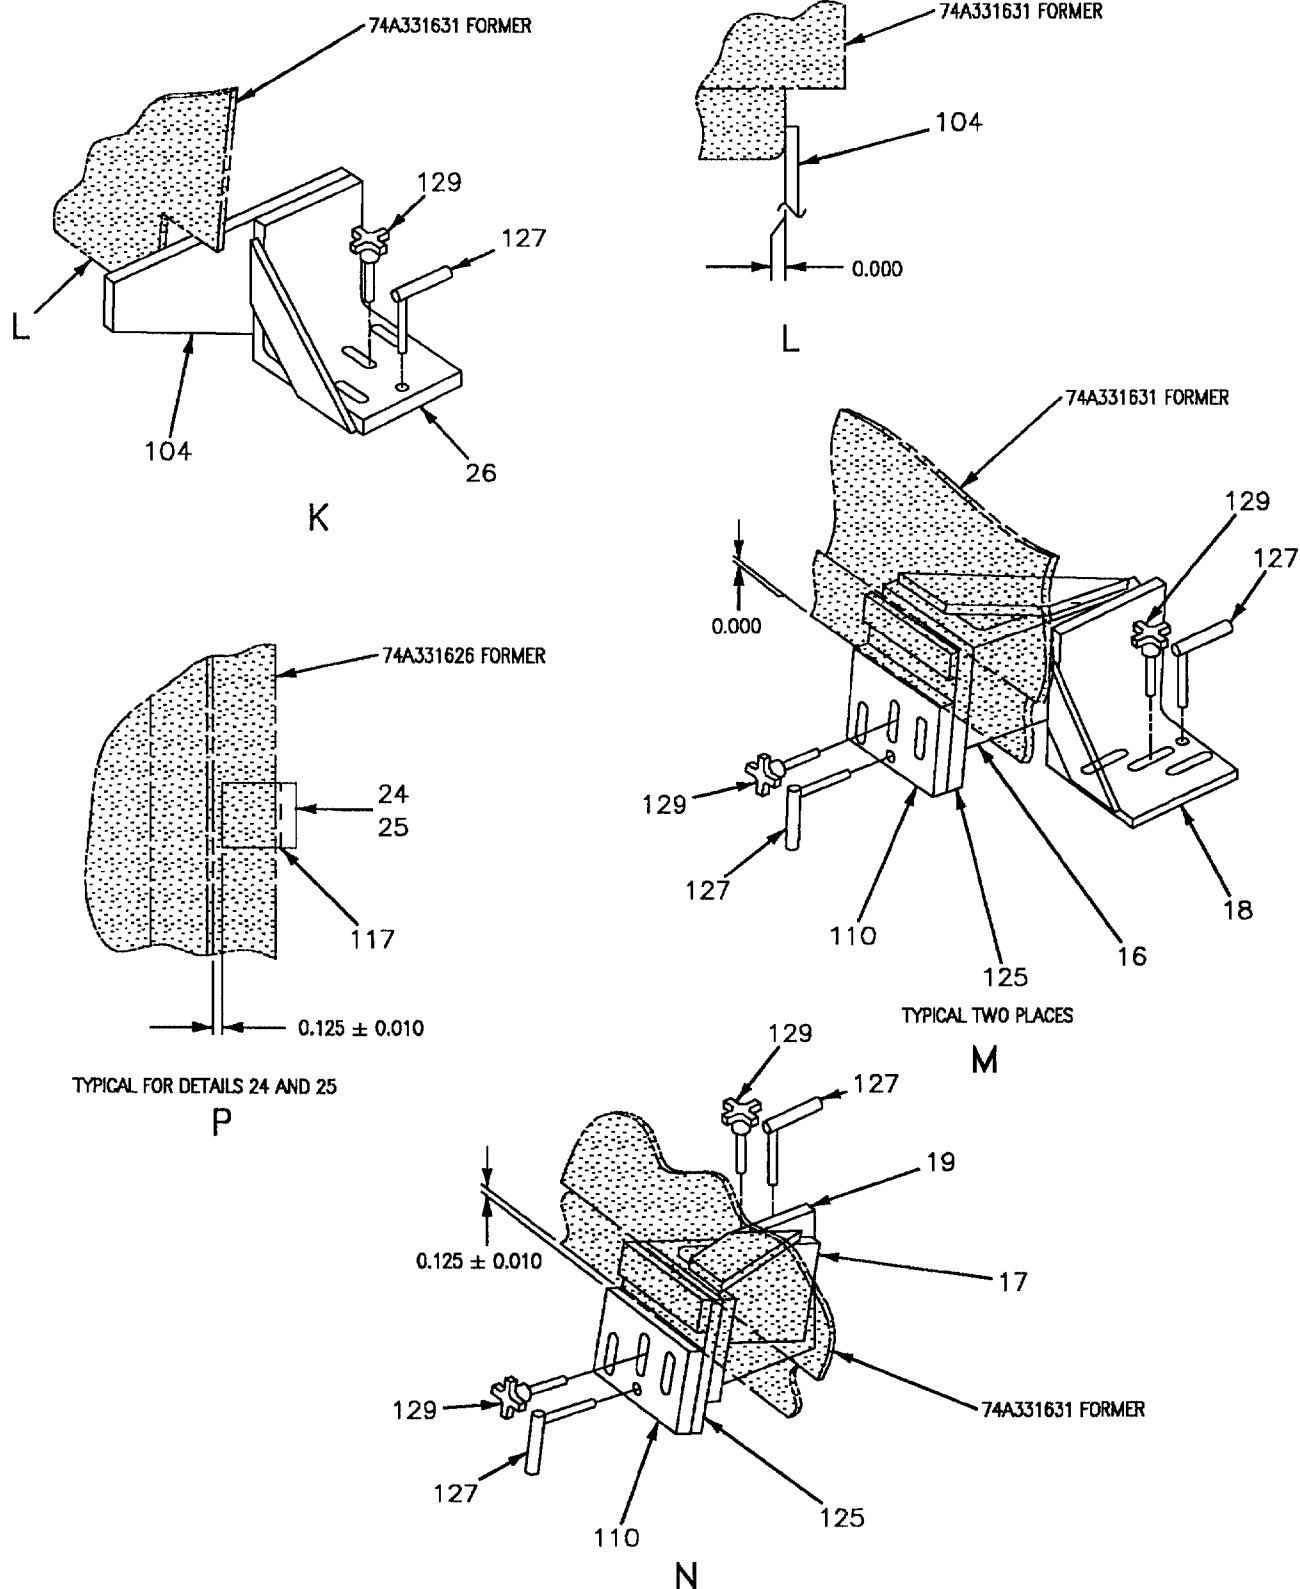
Installation of Door Into Maintenance Fixture (Sheet 6)
